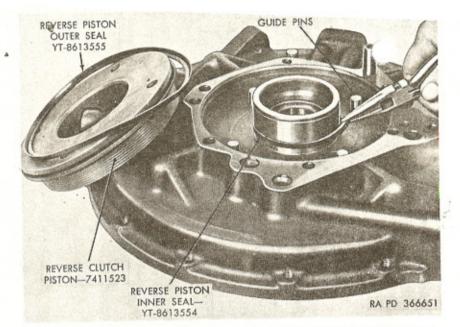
Removing seals from output shaft bearing retainer and reverse clutch piston.
